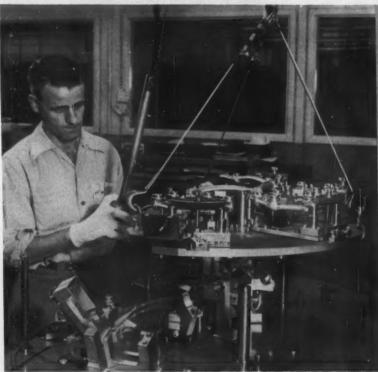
Each manifold half-circle is assembled on a fixture plate which then is positioned on a brazing cabinet. Meanwhile, the next half-circle is assembled on another fixture plate.
